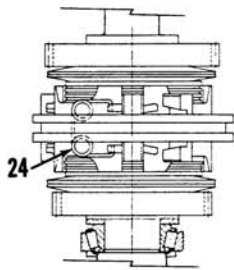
Attach ends of return springs (24) to holes in pressure plates.
